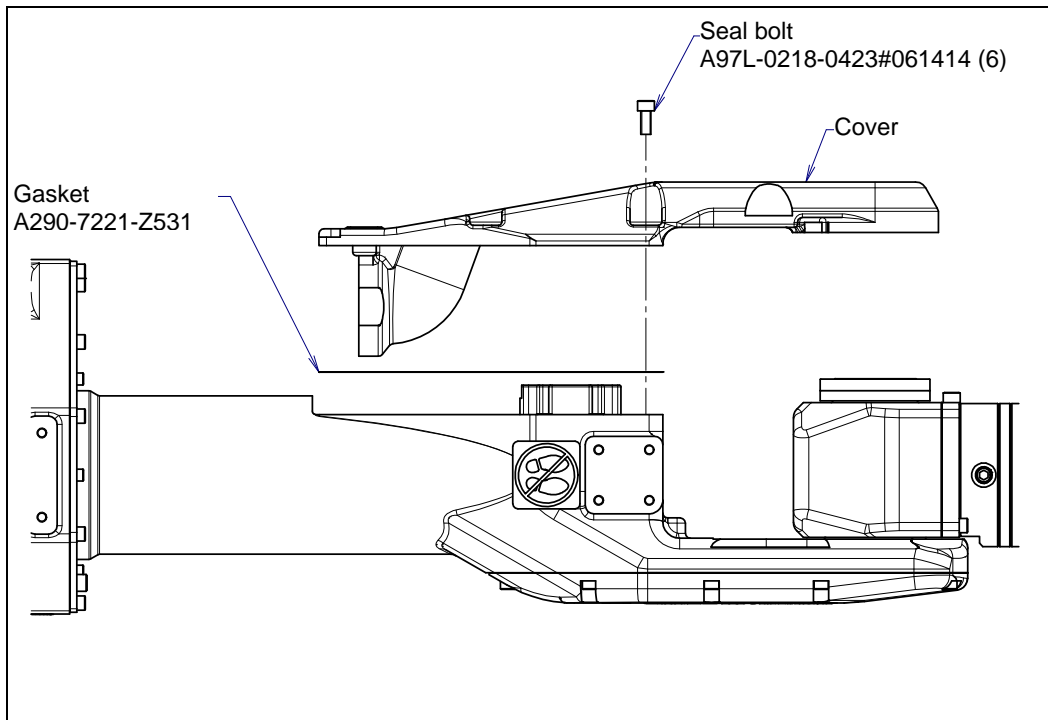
(c) Replacing cable kit (J3 arm part) (10M/10MS)
